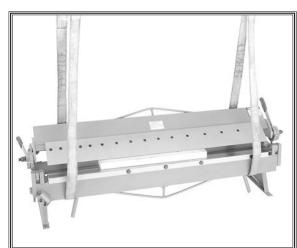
Example of pan & box brake supported by lifting straps and 2x4 to secure clamping leaf.
